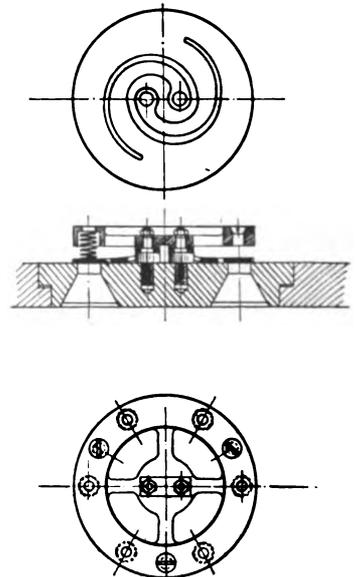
Gas and Air Pump Valves, Borsig Co.'s "Oechelhäuser" Engine.
